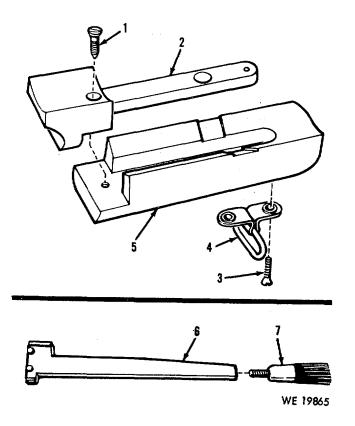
Fore end assembly and screwdriver and wrench combination-exploded view.
